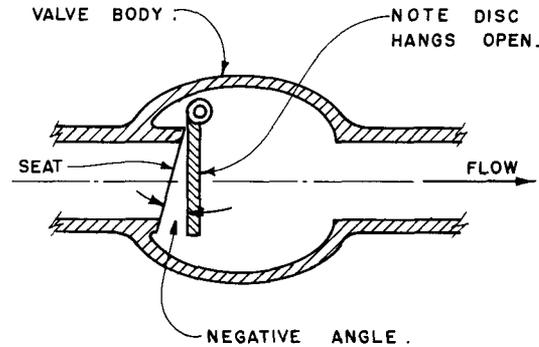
Check Valve With Negative-Angle Inclined Seat.
